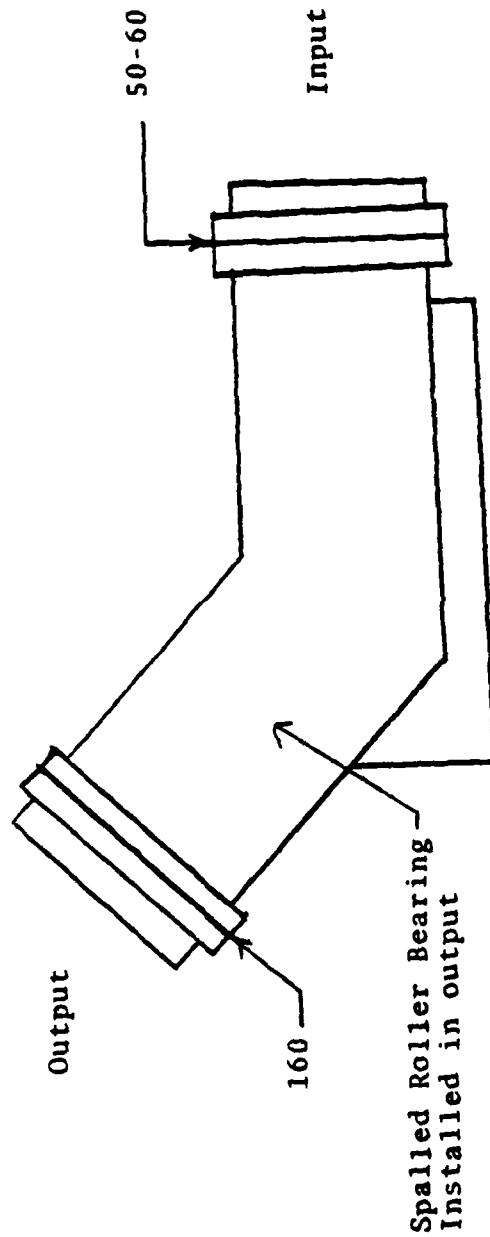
42° GEARBOX IMPLANT BHC-021 SPADE READINGS (TEST CELL)
